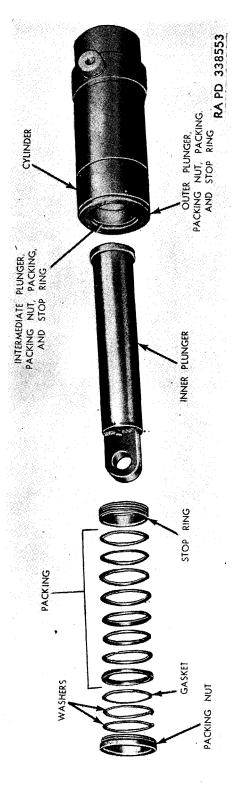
Hydraulic jack assembly bulldozer M1A1—with inner plunger assembly—disassembled.
